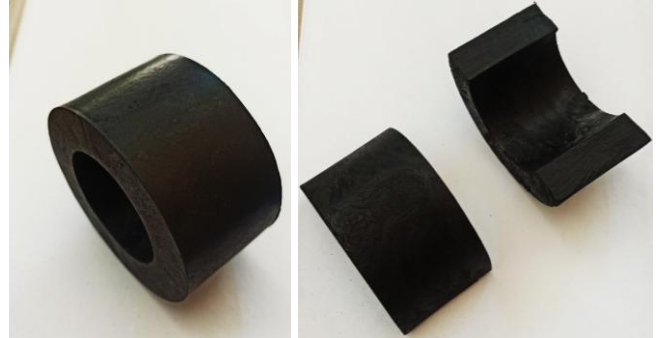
Experimental elements of the bearing supports of the screw conveyor: a – part (workpiece) of a cylindrical shape made of PCM; b – experimental sliding half-bearings
